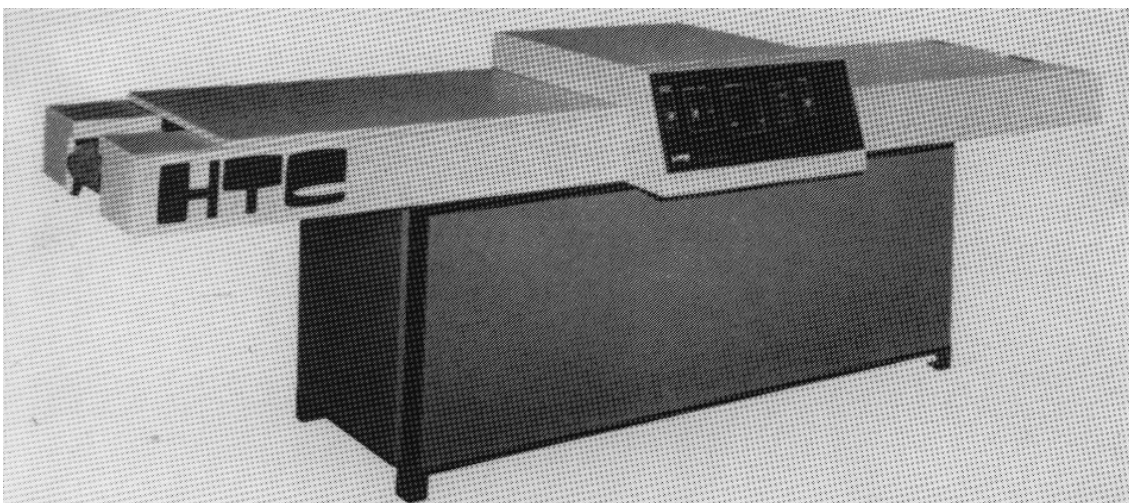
b): Industrial in-line vapour phase soldering machine.
